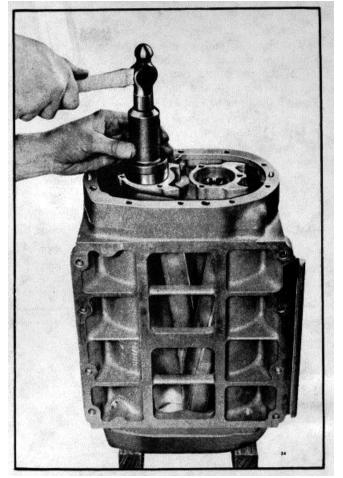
Installing Ball Bearing on Rotor Shaft and in Rear End Plate using Tool J 6270-7.
